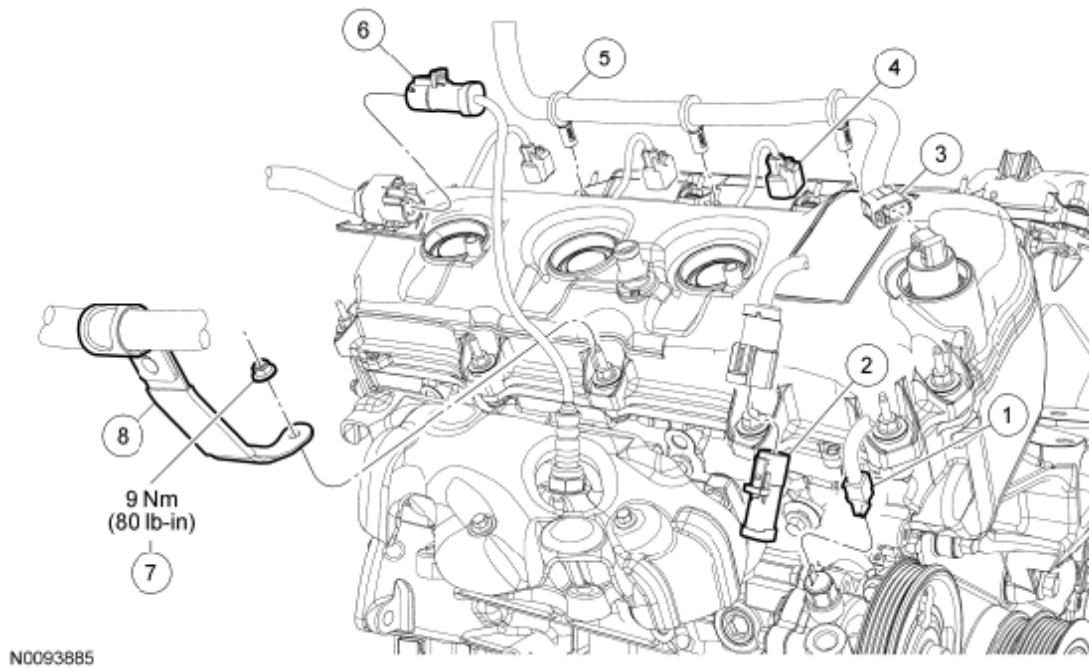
Identifying Valve Cover Components With Torque Specifications RH (2 Of 3)
